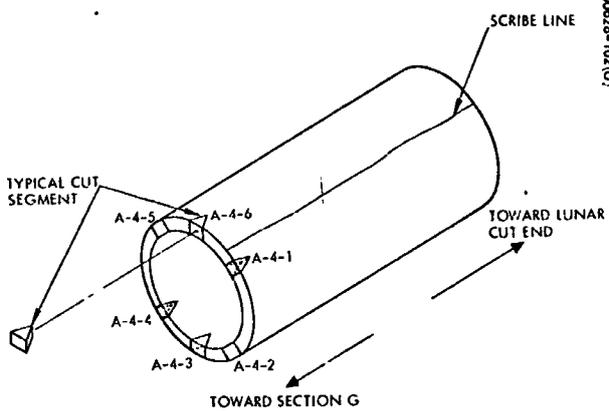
Section A-4 of Polished Aluminum Tube Shown in Figure A-3, Showing Further Segments Removed at Hughes
